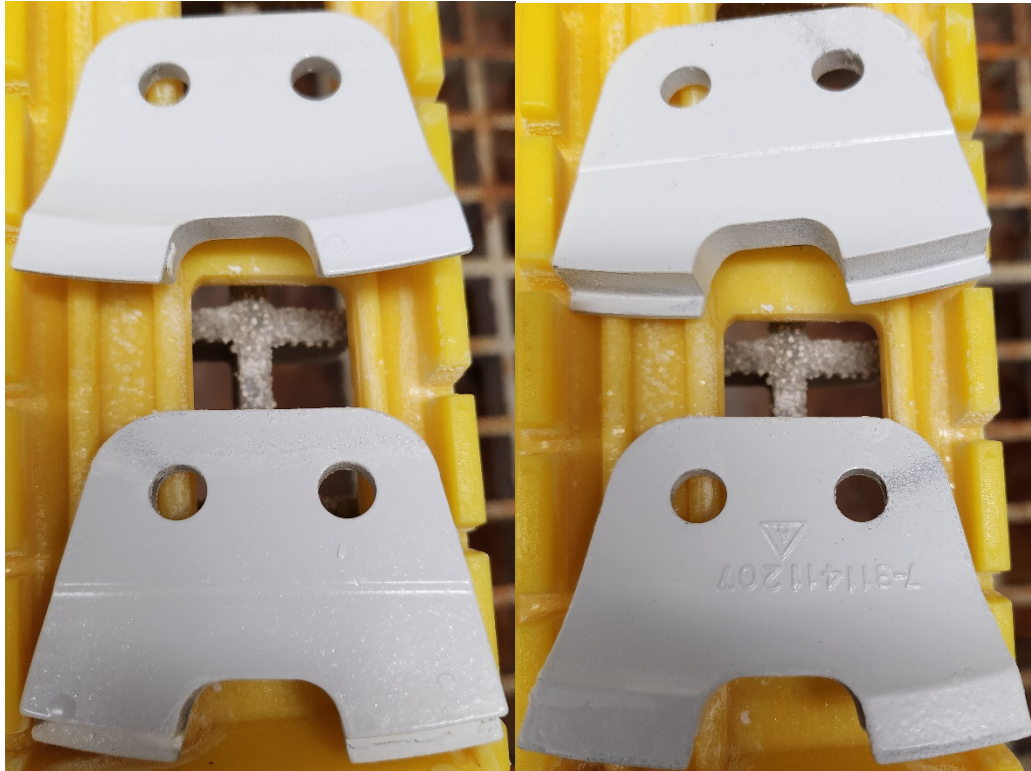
AH-64 main rotor head bearing retainers at 1008 h (ASTM B117).
